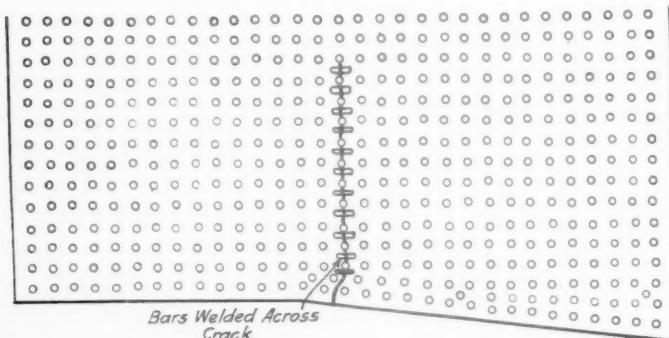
Method of Reinforcing Welded Cracks
